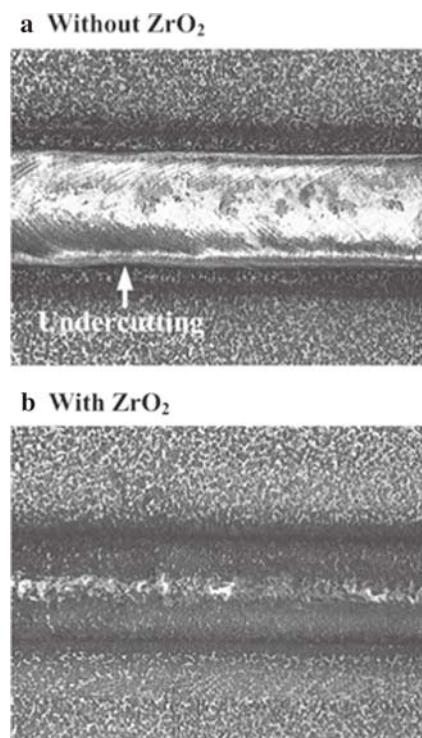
Appearance of TIG welds produced with and without ZrO₂ at a welding current of 200 A and a travel speed of 600 mm/min
